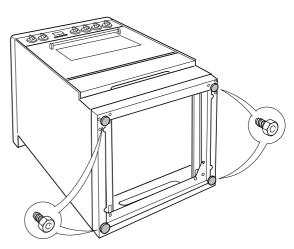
Fitting the adjustable feet (supplied with the cooker in a separate kit)
